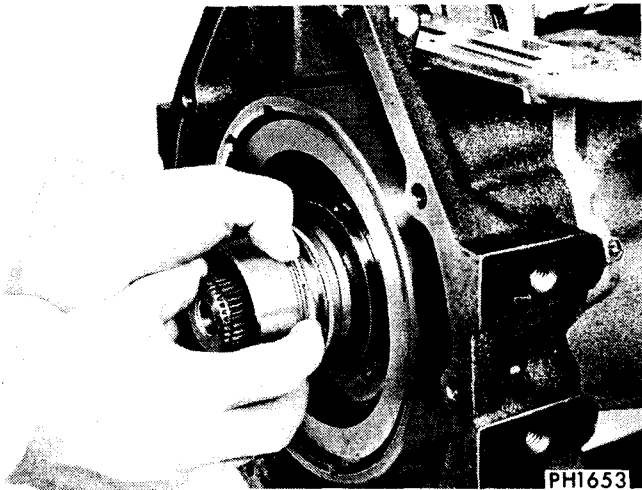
Removing or Installing Compounder Annulus Gear
